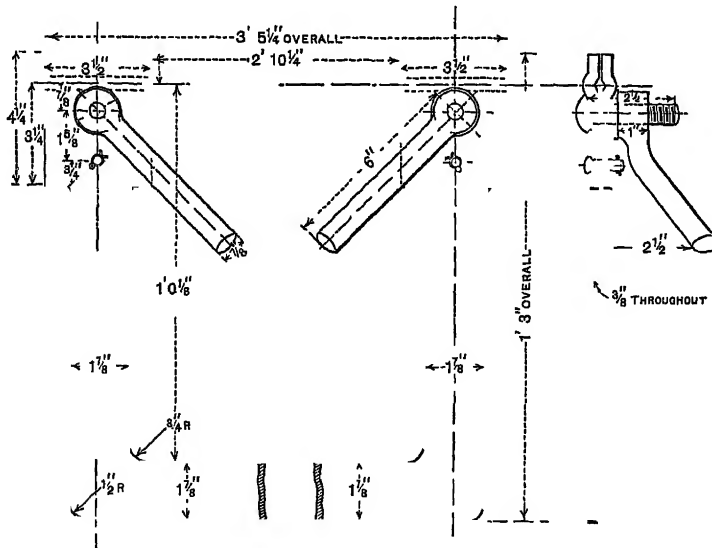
Cramp for holding Wires while Ears are being soldered on
